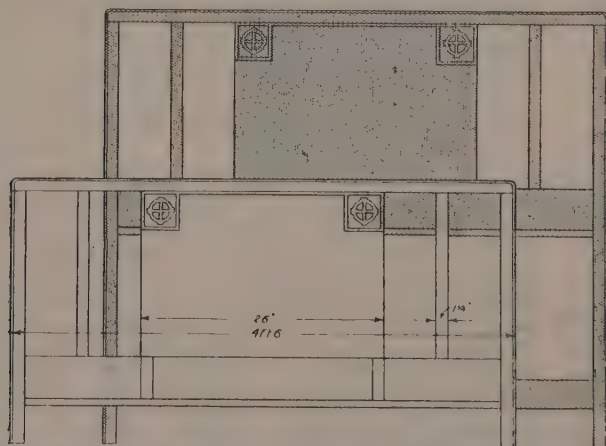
DIMENSIONS FOR 4 FT. 6 IN. BEDSTEAD.
